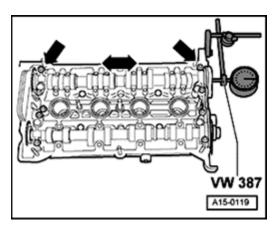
Camshaft Axial Clearance, Checking - Intake Camshaft Courtesy of VOLKSWAGEN UNITED STATES, INC.
